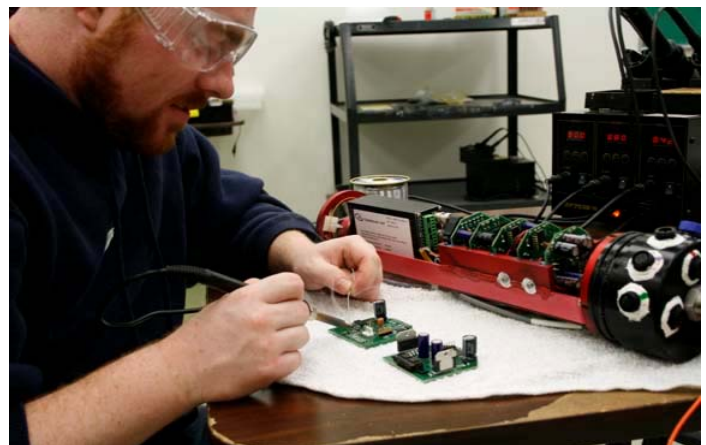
ADAM FIXES A SOLDER BRIDGE ON A CIRCUIT BOARD
